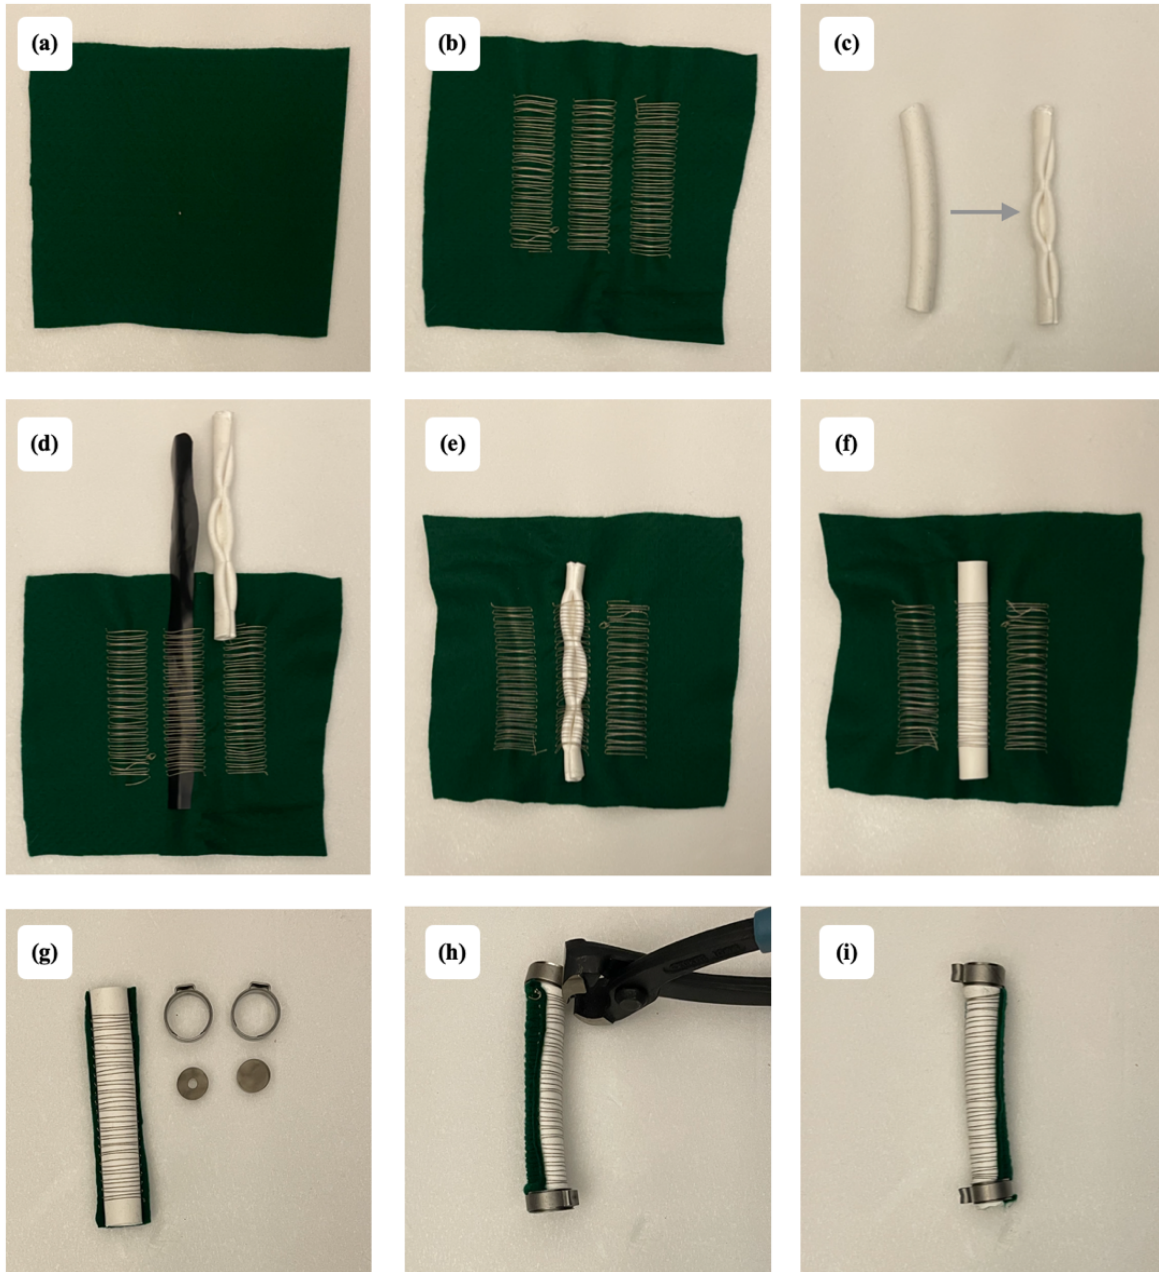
The different steps of the assembly process are shown: (a) gather backing material, (b) embroider the pattern for the outer ‘mesh’, (c) fold and secure the inner silicon tube with tape, (d) insert the Velostat piece into the embroidered outer ‘mesh’, (e) use the Velostat piece to slide the silicon tube into embroidered outer ‘mesh’, (f) unfold the tube and ensure all threads are carefully positioned, (g) cut out around the silicon tube and gather the acrylic pieces and hose clamps, (h) insert the acrylic pieces and tighten the hose clamps, (i) the actuator is complete.
